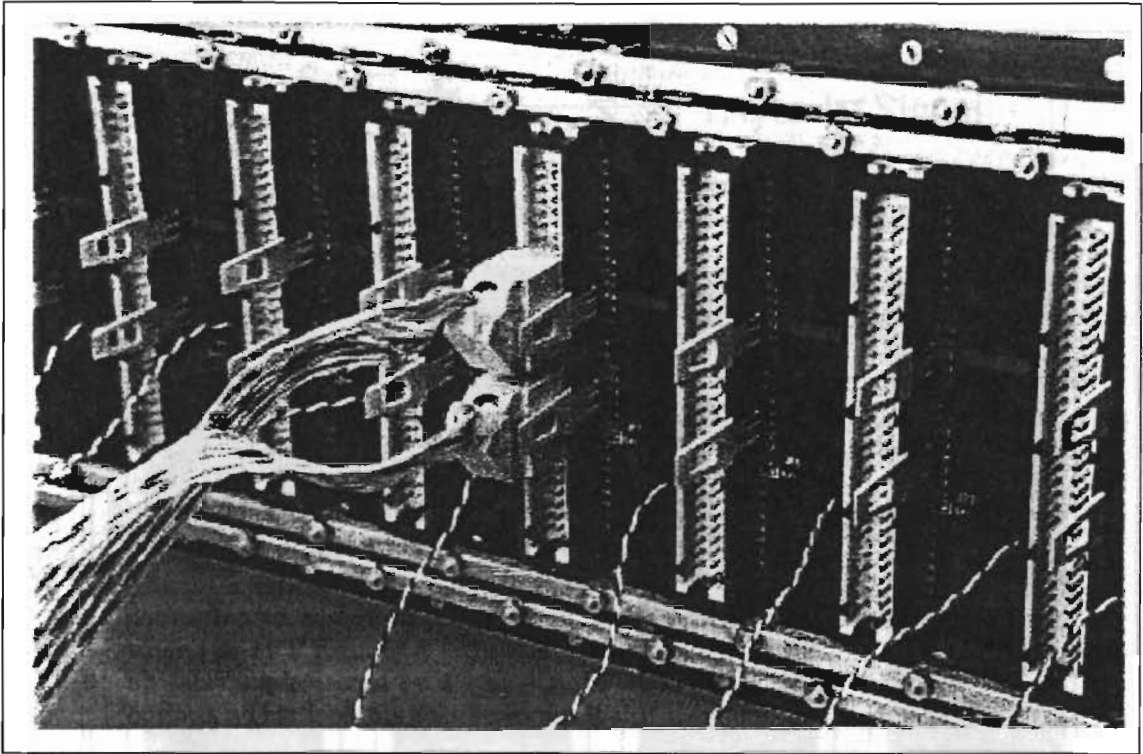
The 7X2 IDC Cable Connector Assembly
